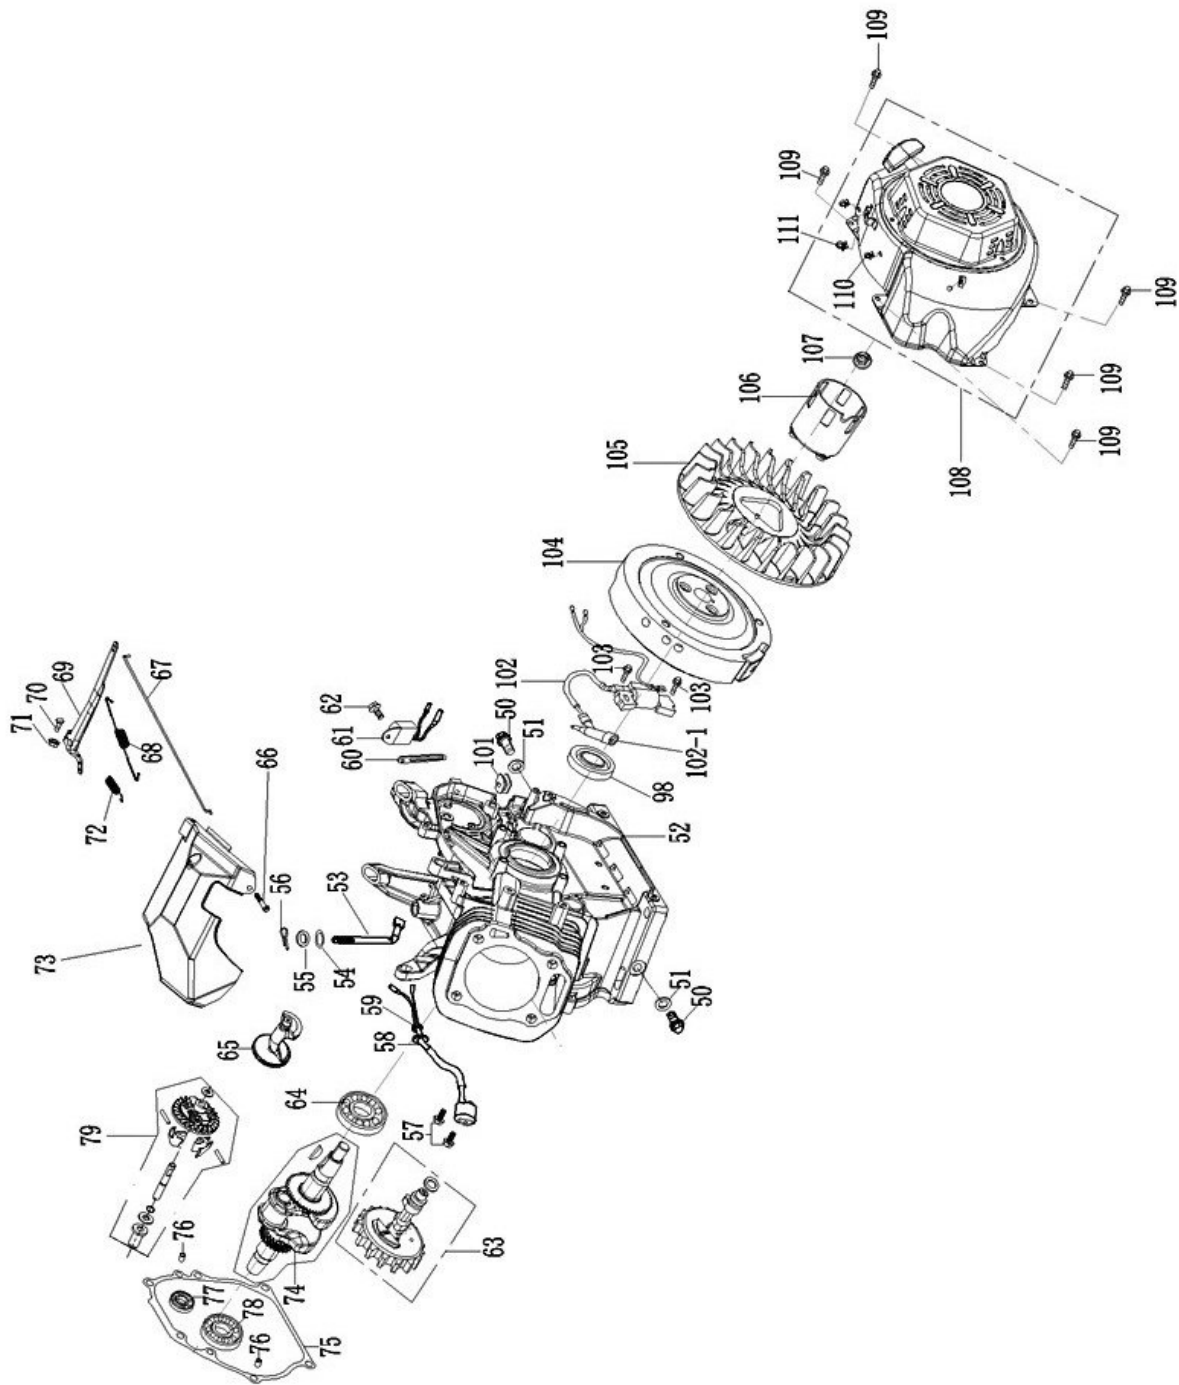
Spare parts drawing 4 PG-E 60 SEA, PG-E 80 TEA and PG-E 90 SEA
